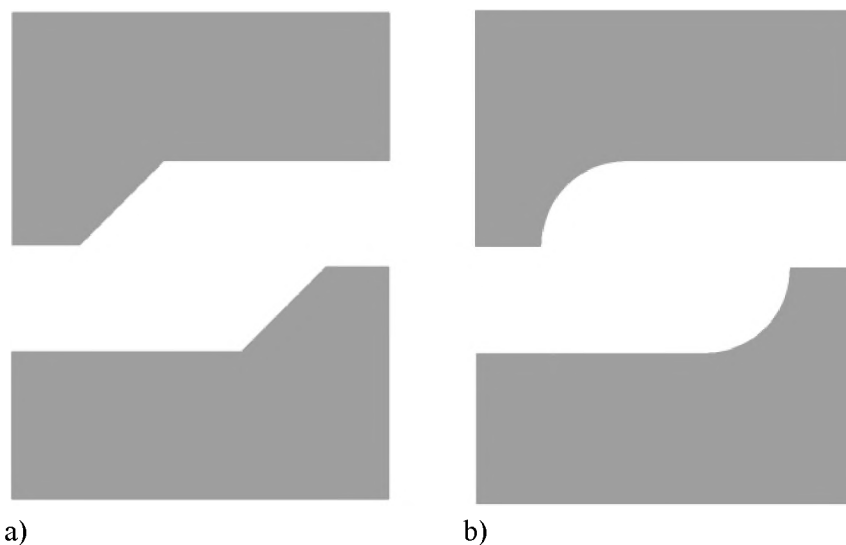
Tools for broaching: a – with an angular joint; b – with a radial joint.
